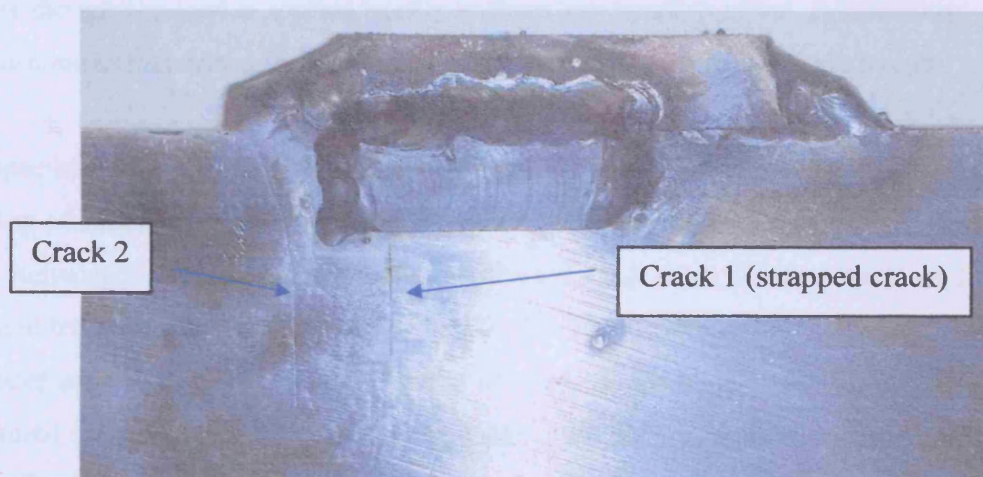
Photo shows the specimen with two cracks before removing the welded straps.
